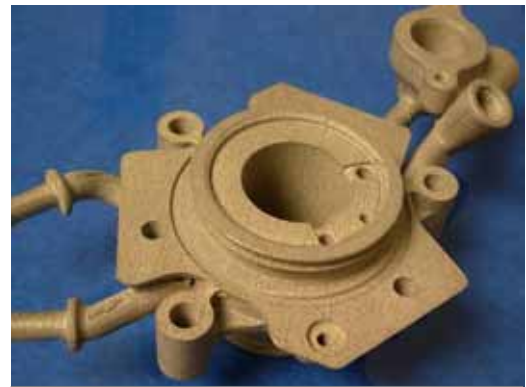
Topologically optimised diesel pump housing manufactured using MCP Selective Laser Melting. This part weights 60% less than the original casting
